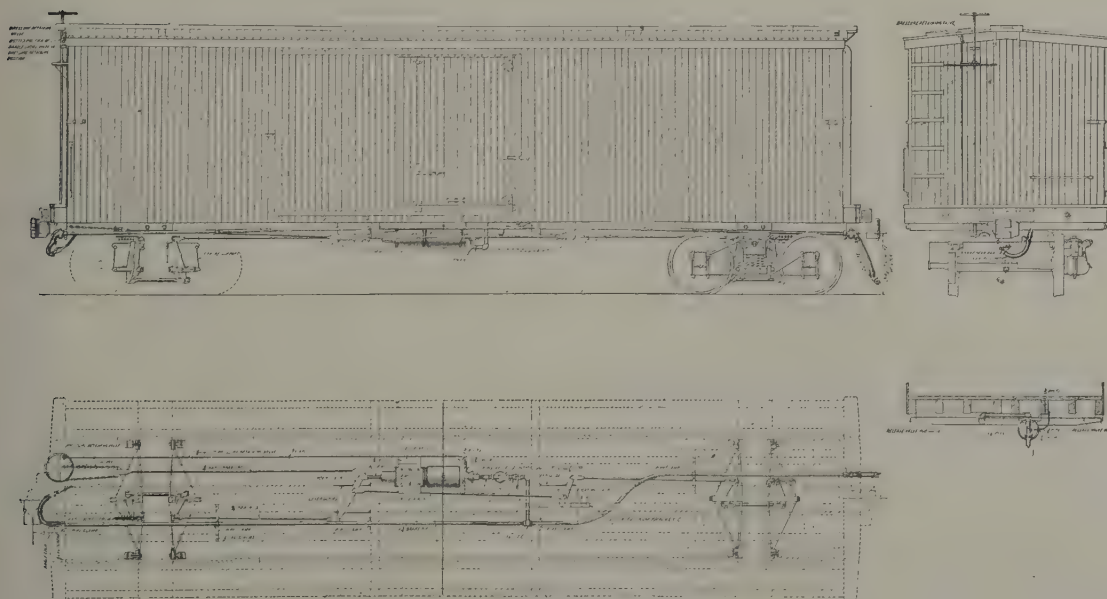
Westinghouse Single Cylinder Air Brake Equipment Applied to a Freight Car.
